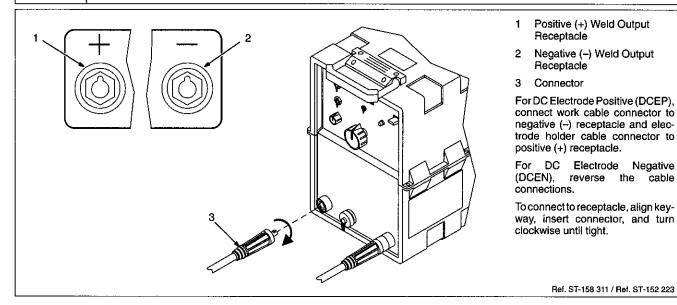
Connecting To Weld Output Receptacles
